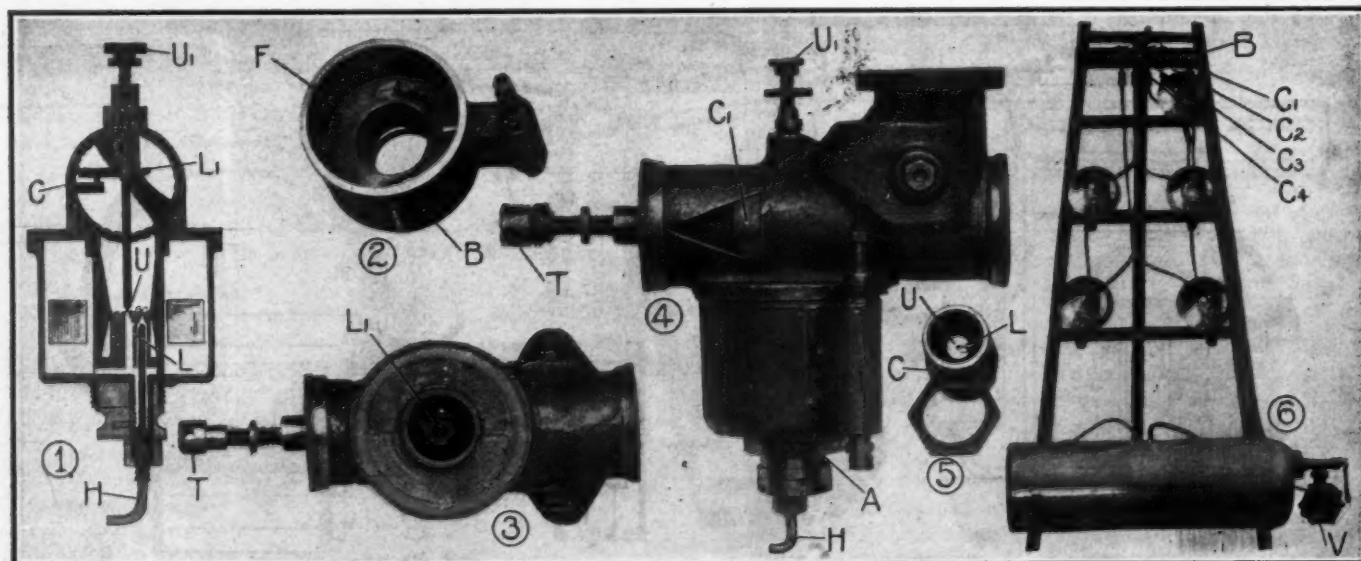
Section through G. & T. float-chamber and needle mechanism. Fig. 2—Float-bowl and float. Fig. 3—Top view of auxiliary fuel-flow device. Fig. 4—View of G. & T. carbureter. Fig. 5—Casting containing needle valves. Fig. 6—Arrangement of units on Prest-O-Liter
